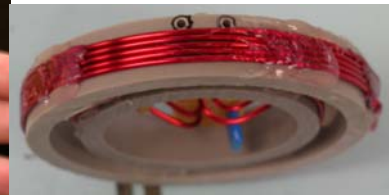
Soldering Sensing Circuit Inductor Wires to PC Component Board
